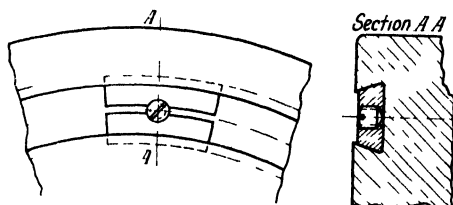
BALANCE WEIGHT IN THE FORM OF A DOUBLE RING SEGMENT DOVETAILED INTO GROOVES
